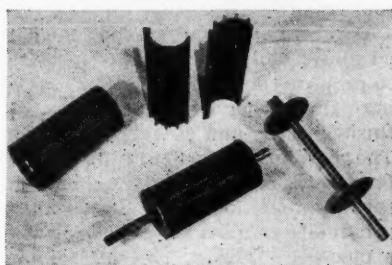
At left is former corrugated roll. New welded roll and shaft (center) are fabricated from steel shapes as shown.
